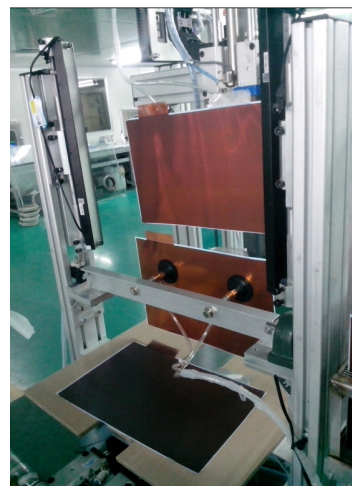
Image caption of both sides of LiPo cell sheets with machine vision.
